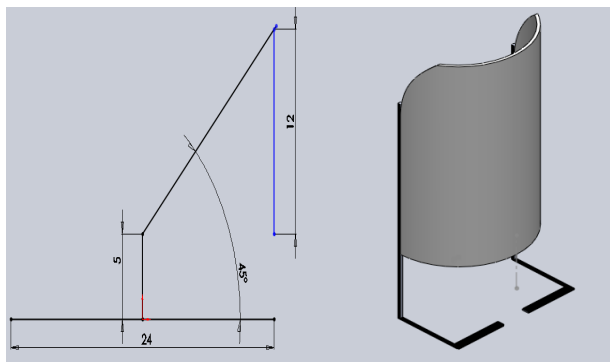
Schematic and dimensions of cutting head (left), schematic of windrowing system (right)
